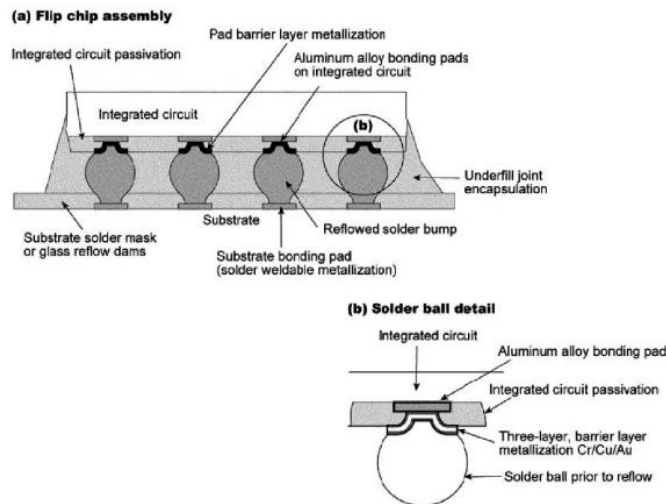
The detailed schematic of flip-chip bonding, A) A cross-section of assembly, B) Details of solder ball [66].
